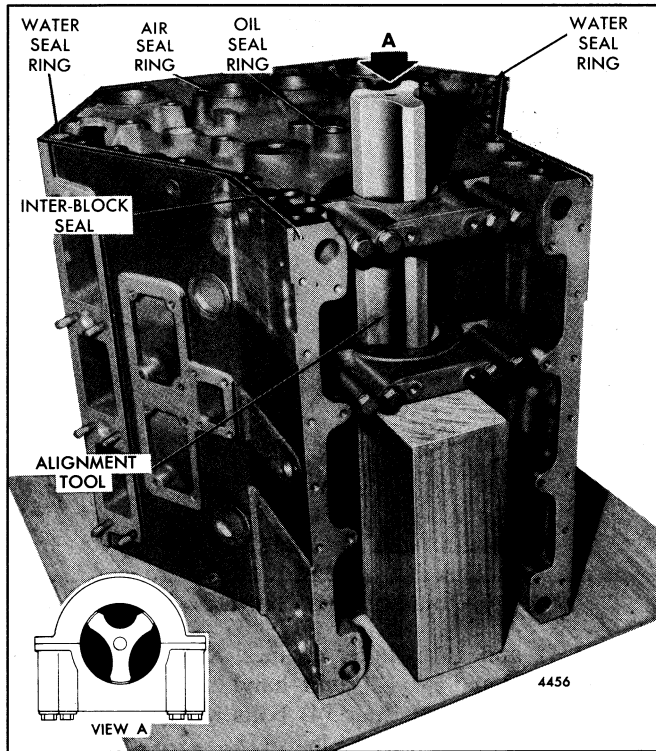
Positioning Crankshaft Bore Alignment Tool
